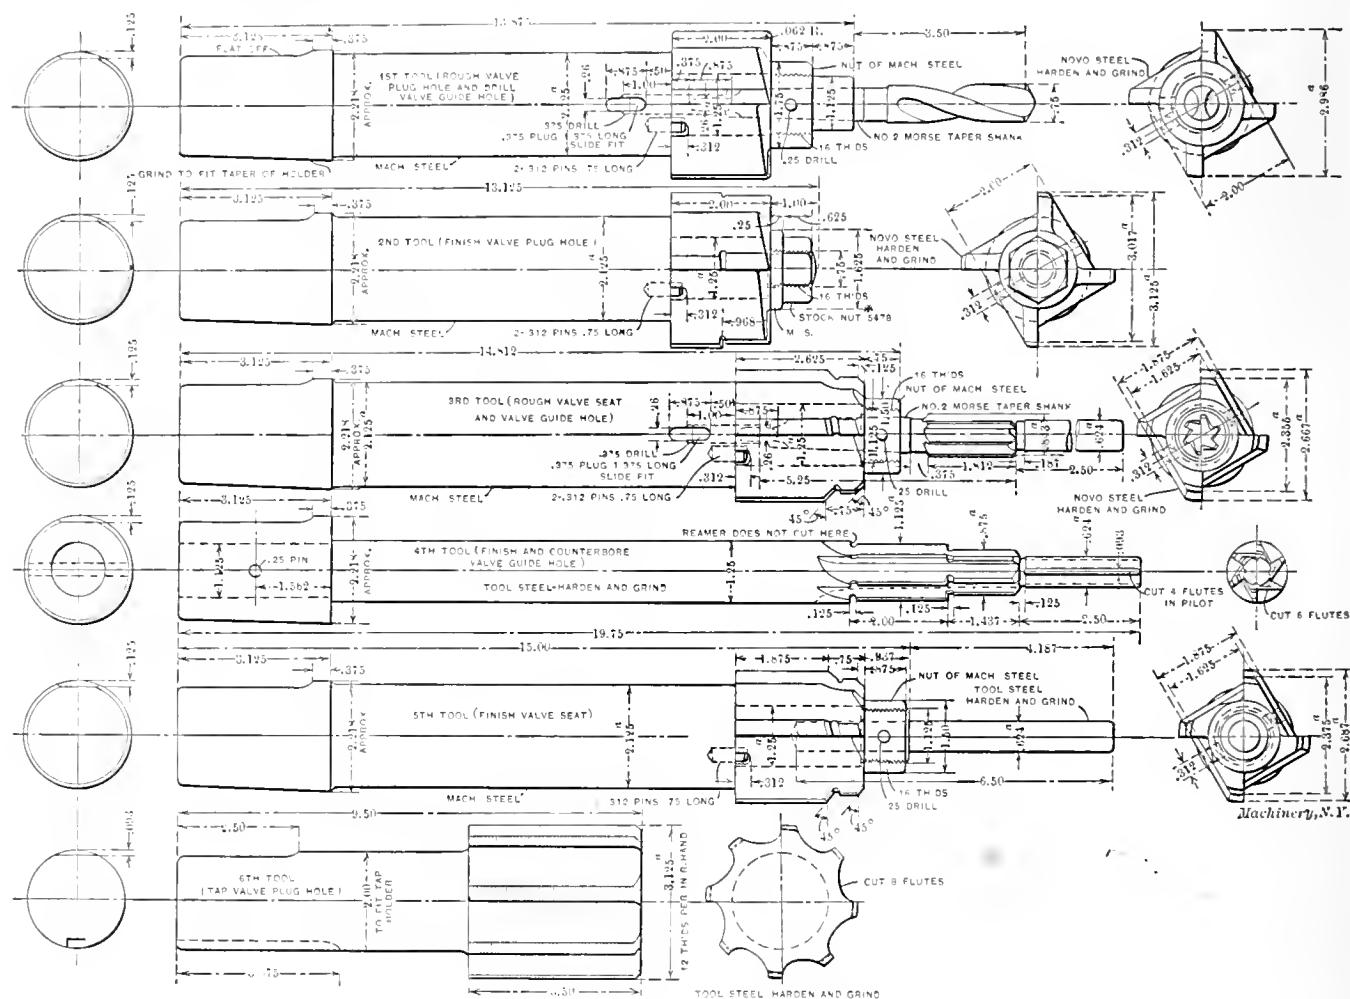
Complete Set of Tools for Finishing Valve Holes.
